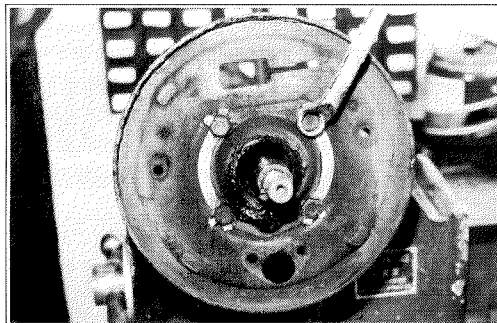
With the hub removed, bend back the tab washers and undo the 4 bolts securing the back plate, grease trap and front seal.
